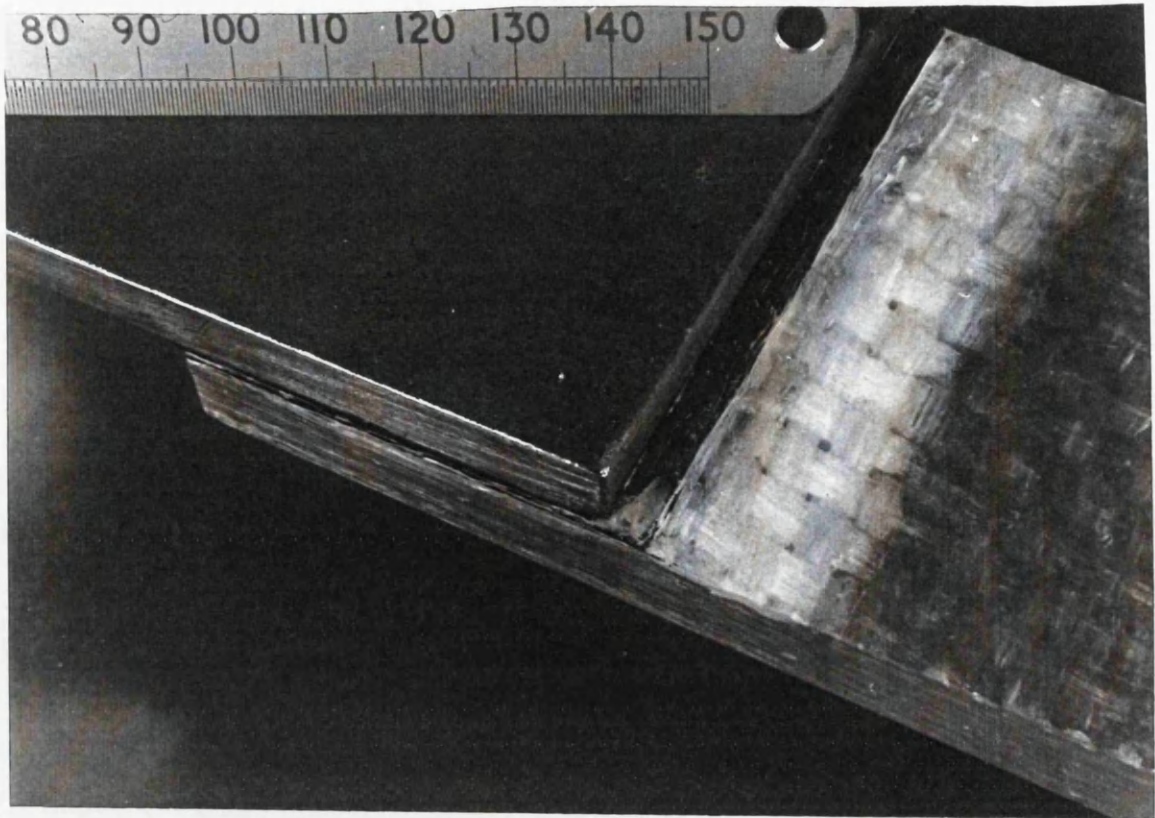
DELAMINATION OF GRP SKIN IN STEEL/GRP TENSION SPECIMEN PRIOR TO ADHESIVE JOINT FAILURE (TYPE 5-FIGURE 4.22)
